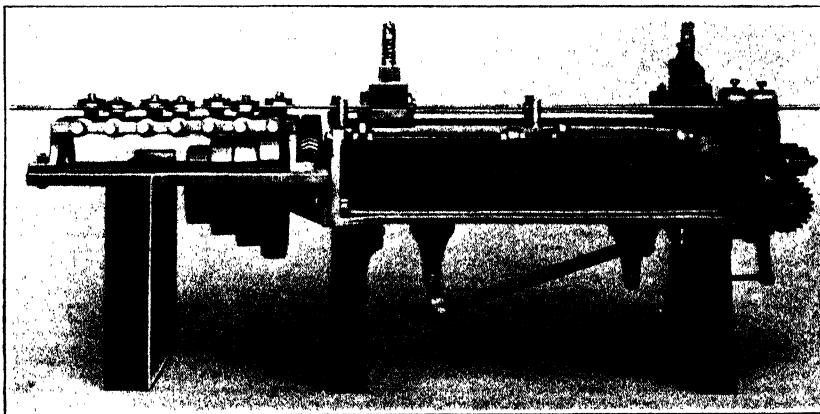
ROLL TYPE STRAIGHTENER—G. CROSSLEY.
